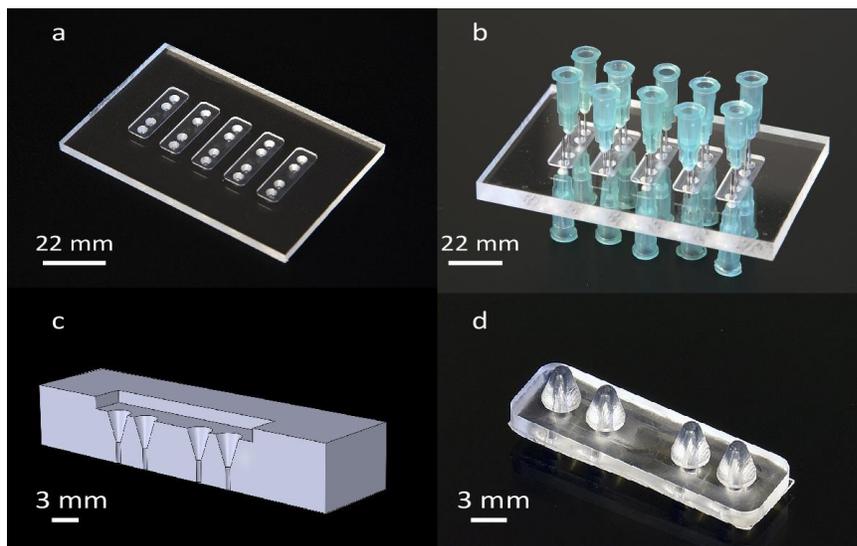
a) CNC machined Plexiglas mold for casting PDMS ferrules. b) 0.8 mm needles are inserted in the holes so that the fluidic tubing feeds through the ferrule. c) Cross section of the Plexiglas mold, which is shown in (a). d) Actual PDMS ferrule.
